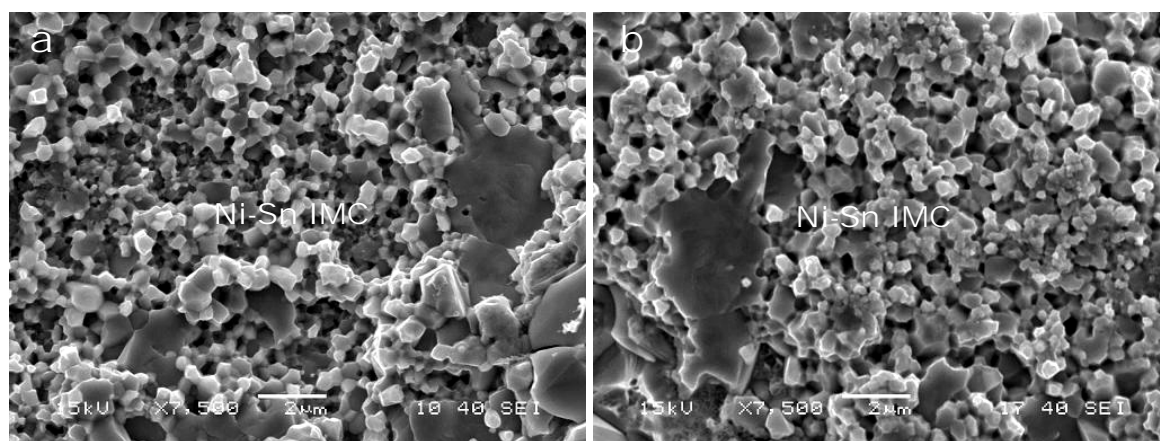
Fracture surfaces of the Ni/Sn-3.5Ag solder joint aged at 160 °C for 100 h with $3 \times 10^3 \text{ A/cm}^2$ current density, showing fine grains of Ni-Sn IMC at both the fracture surfaces.
